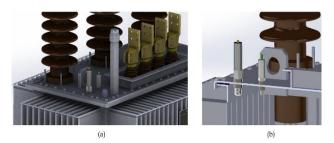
3D CAD model of Transfostick and E+E364 sensor mounted on transformer tank.
